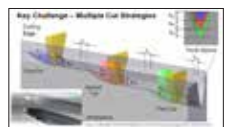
Production of the tooth space on the workpiece using the multi-cut skiving (3) and illustration of the kinematics with stick-shaped chip formation when rotating the workpiece and tool with increased axis arrangement (axis cross angle).
